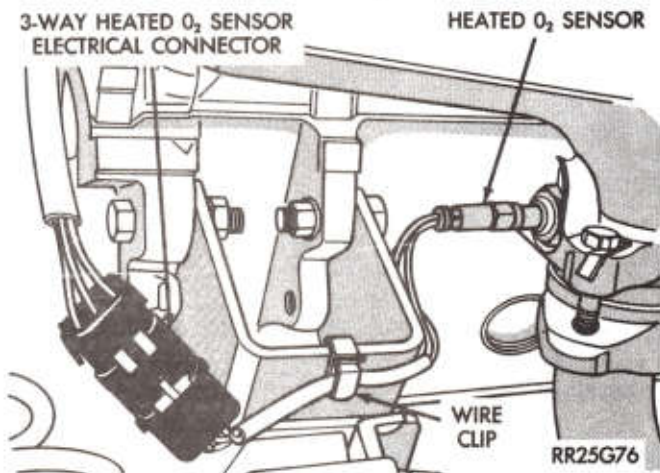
Heated Oxygen Sensor Location 5.2L Engine
